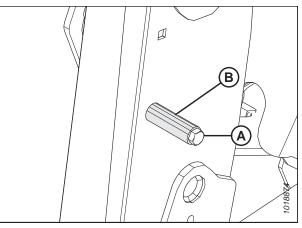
Bolt and Spacer Installed on Windrower Leg
